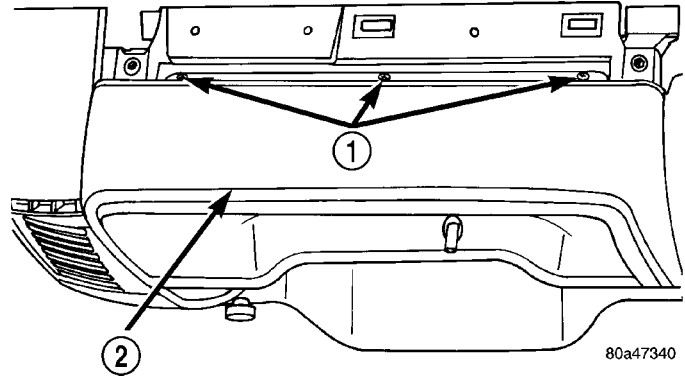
CLUSTER BEZEL UPPER SCREWS REMOVE/INSTALL
